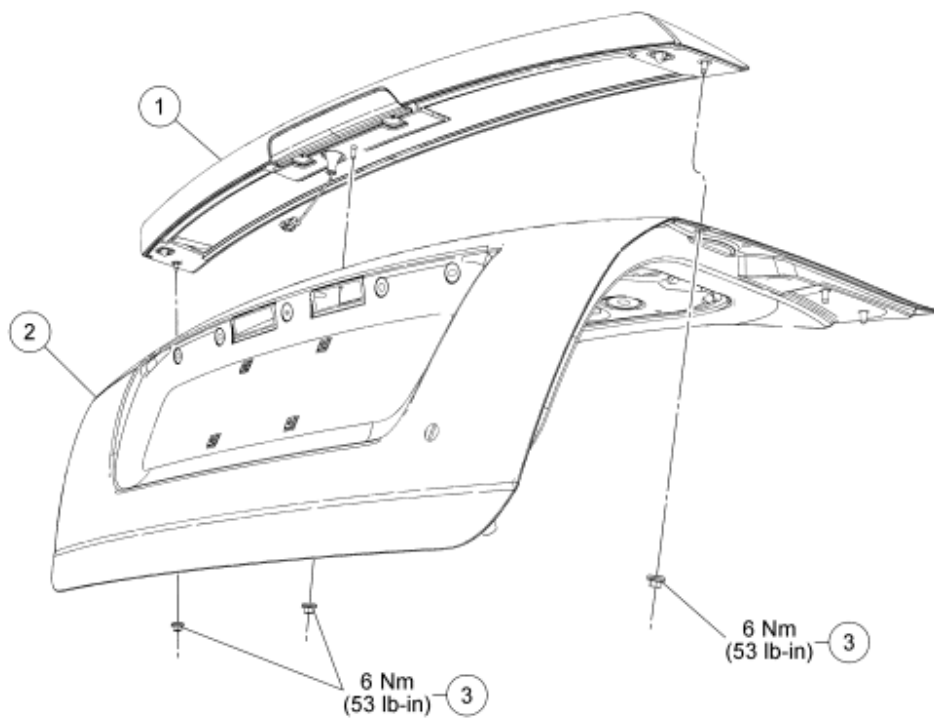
Exploded View Of Spoiler With Torque Specifications - ST
